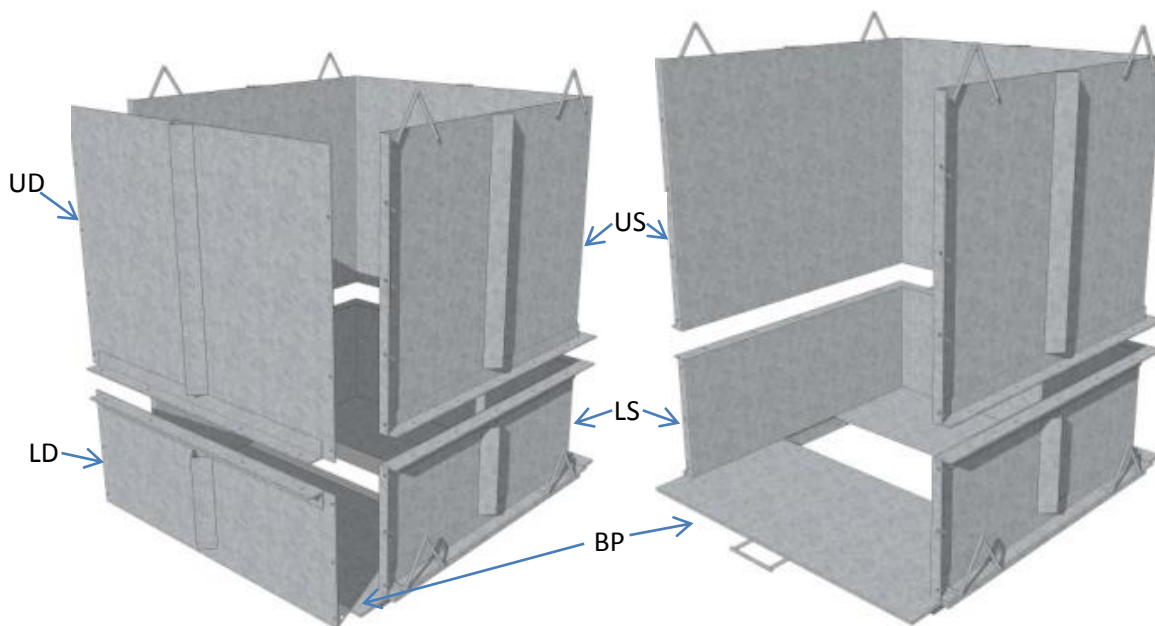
Design of sampler that illustrates the two segments of the sampler, i.e. the upper segment (US) and the lower segment (LS) with the base plate (BP) that slides on the LS. Both segments are equipped with doors, i.e. the upper door (UD) and lower door (LD).
